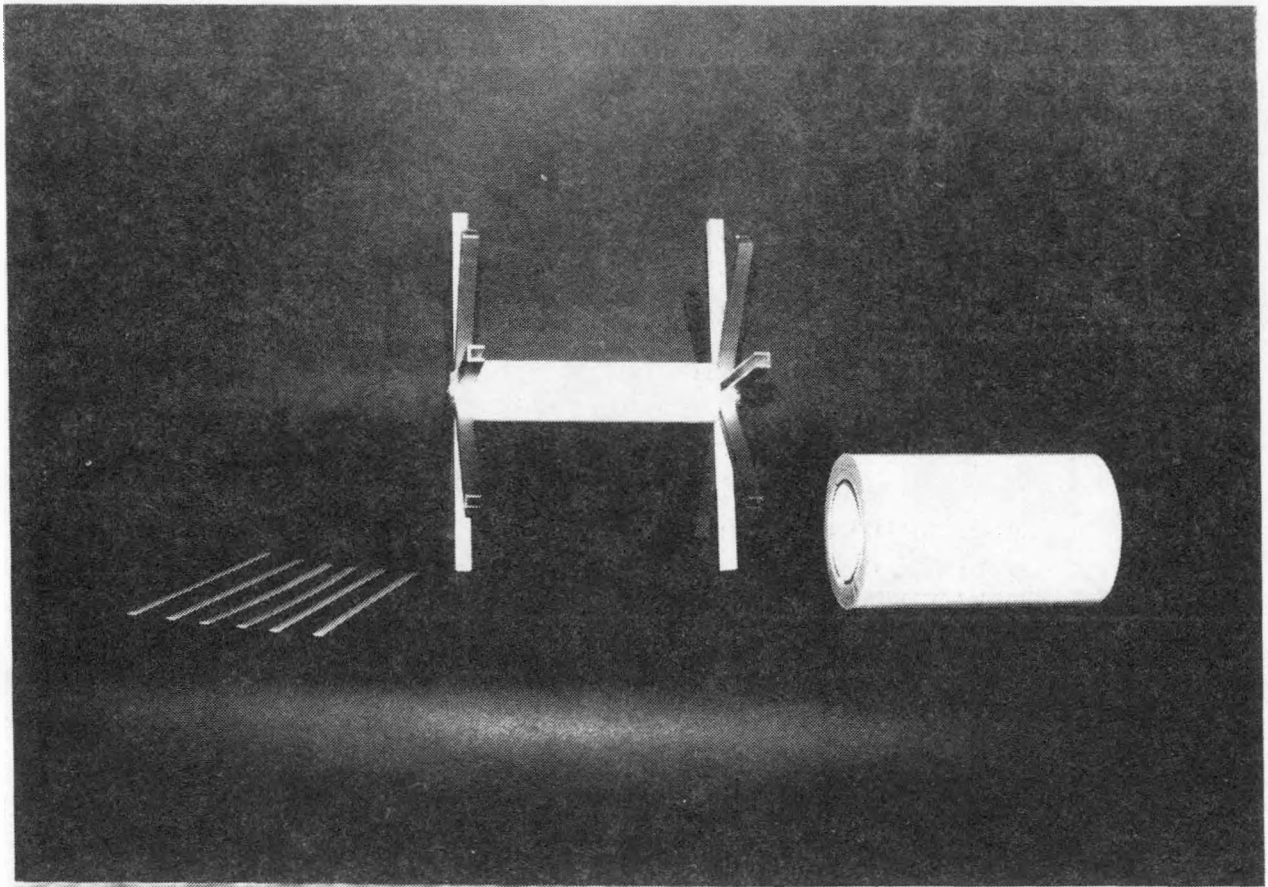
Hub and Spoke Assembly with Spacers and Tape Roll
